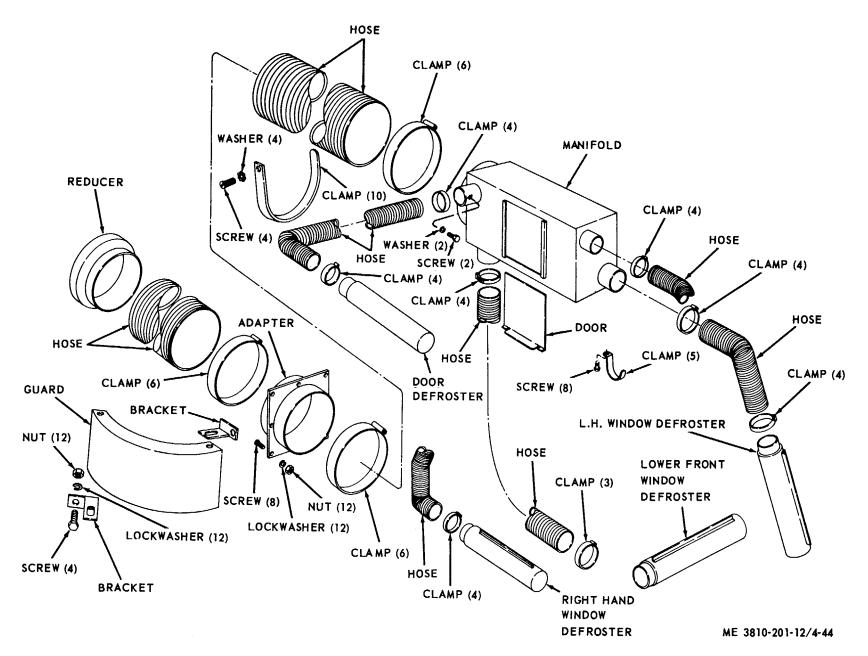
Defroster, hose, and manifold group, removal and installation.
